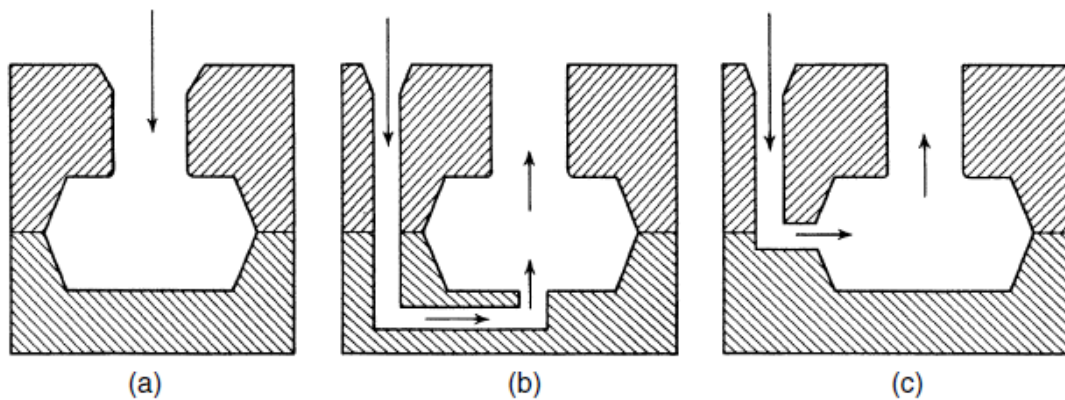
Variations in gating position; (a) Top gating, (b) bottom gating and (c) side gating [15]
